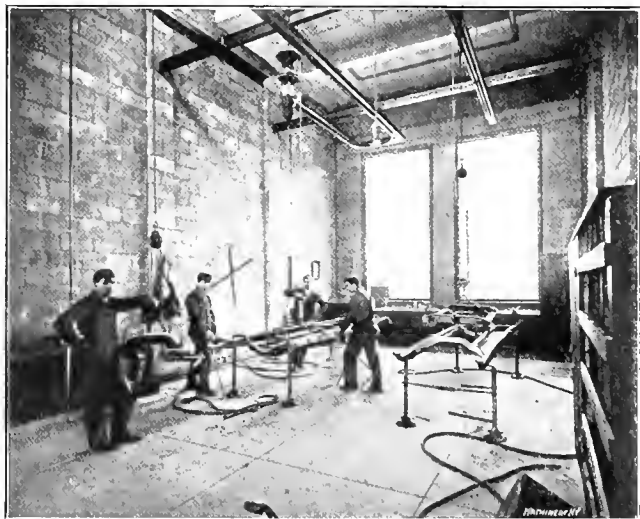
Room in which the Frames are drilled and riveted by Pneumatic Tools
